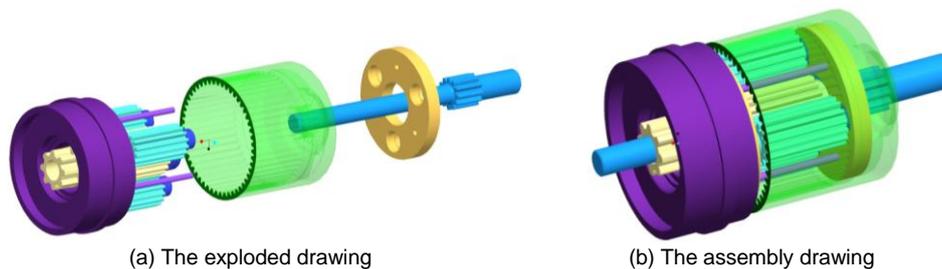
Exploded and assembly drawing of the stand planet mechanism
